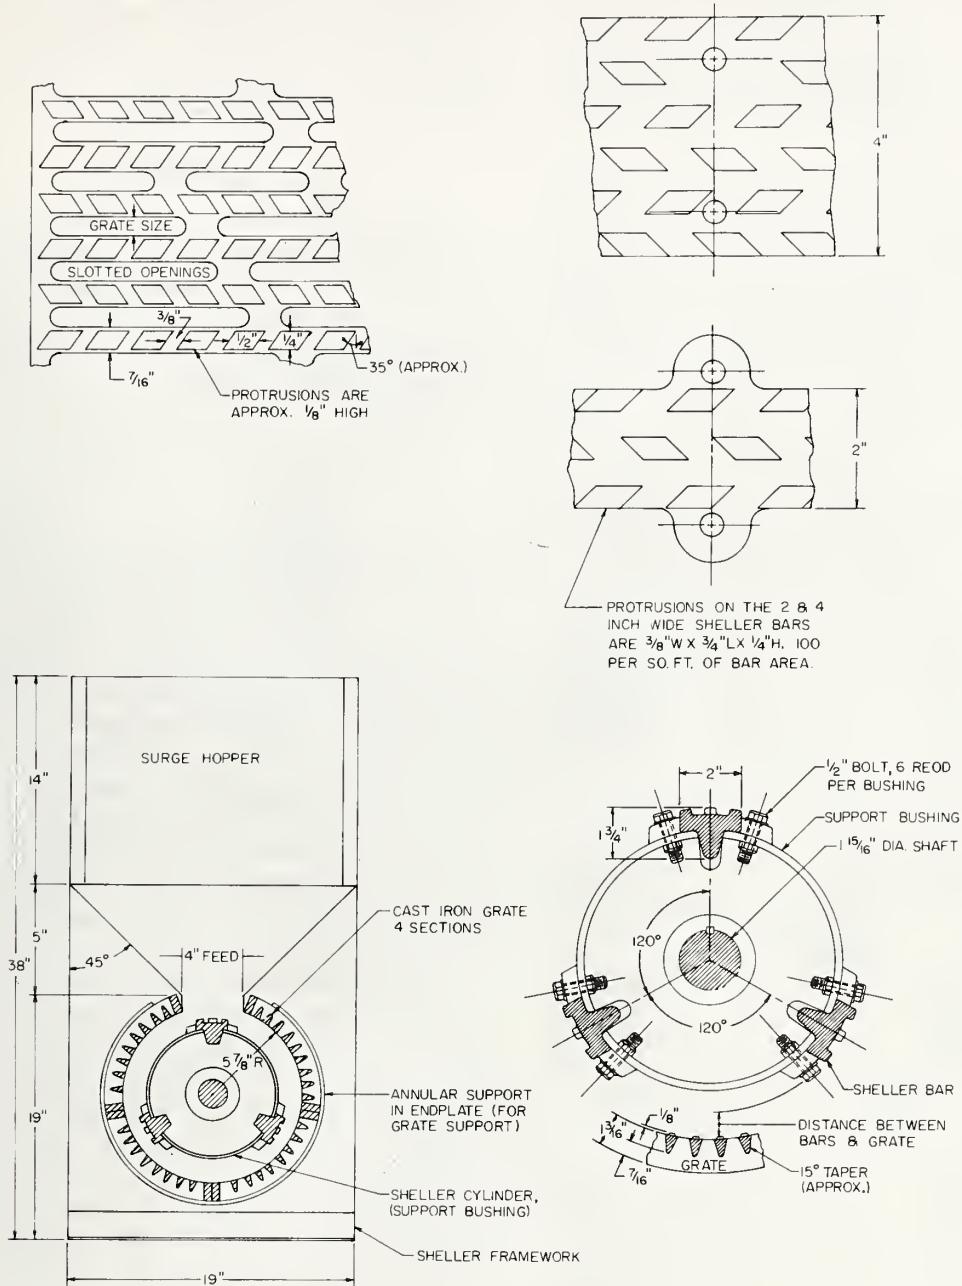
Details of cast-iron peanut sheller. (Top left) Shelling surfaces of grate. (Bottom left) Sectional view of sheller. (Top right) Shelling surfaces of 4-inch-and 2-inch-wide sheller bars. (Lower right) Sectional view of cylinder and portion of grate.
